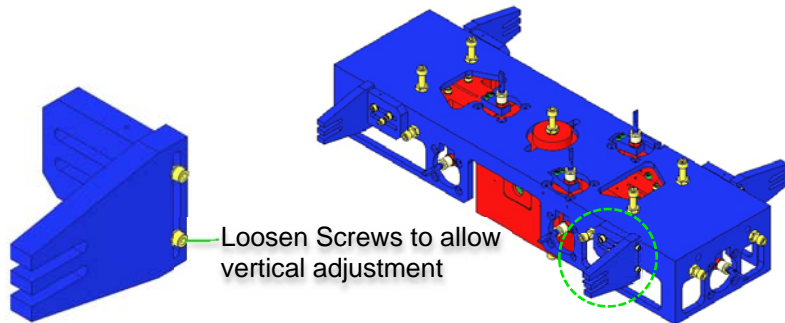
Lowering Coil Holder to eliminate slack in Wires
